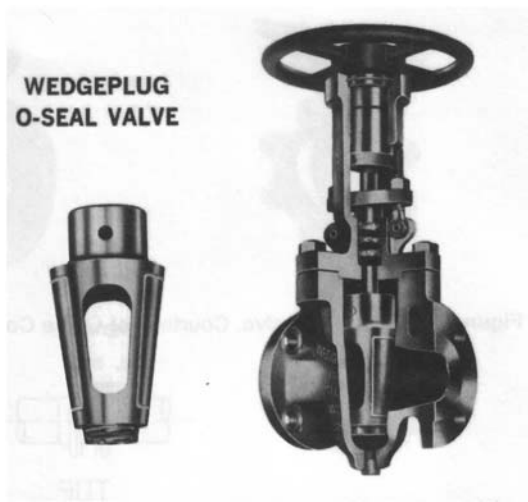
Plug valve. Courtesy of Stockham Valves.
